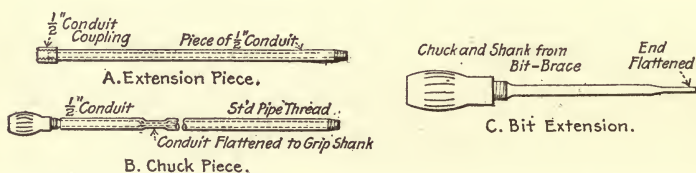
Chuck end of pipe-extension boring tool and detail of bit extension.
